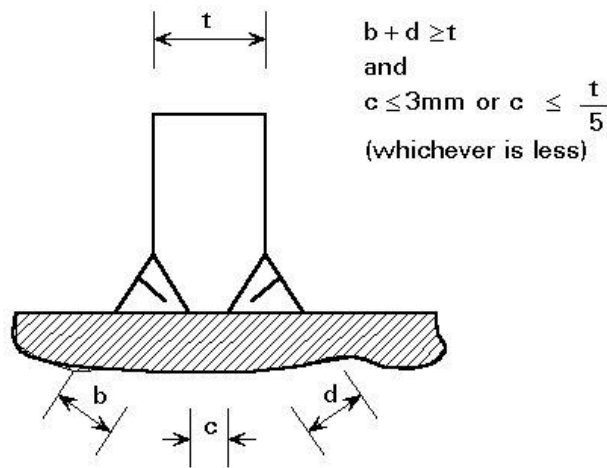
Partial penetration butt weld considered as a full penetration butt weld
